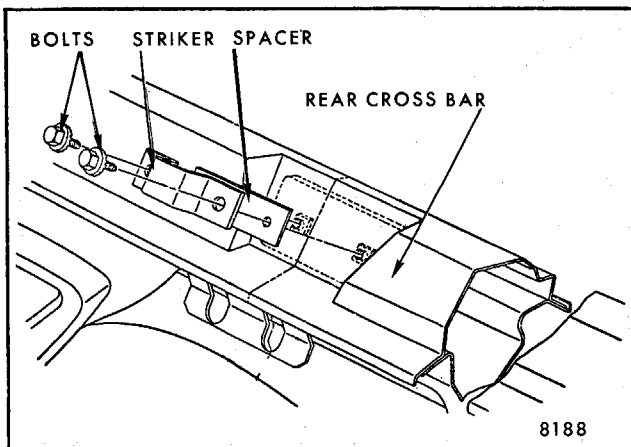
Back Door Striker Installation - "H-15" Styles
